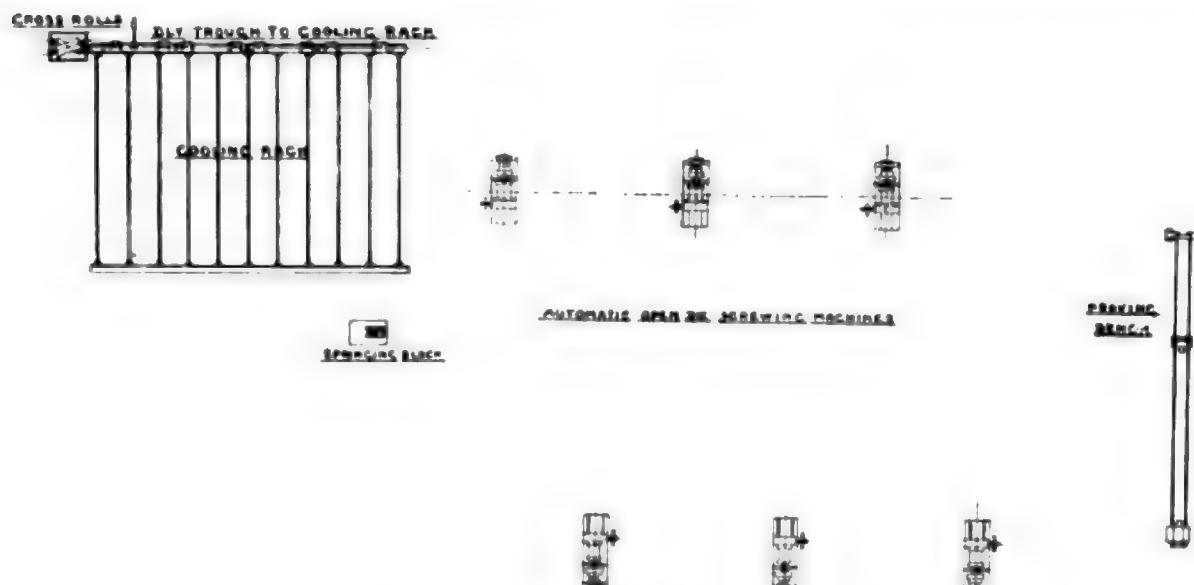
PLAN OF SCREWING MACHINES FOR LAP-WELDING MILL.
